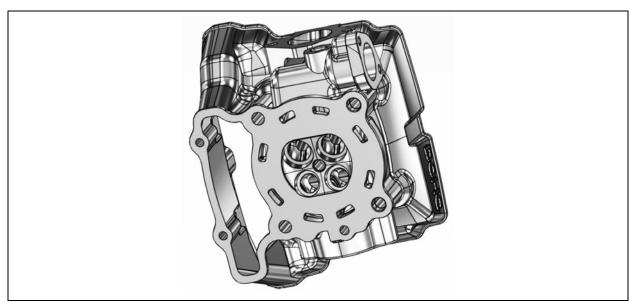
Cylinder Head (XY150) - Bottom Side 185
